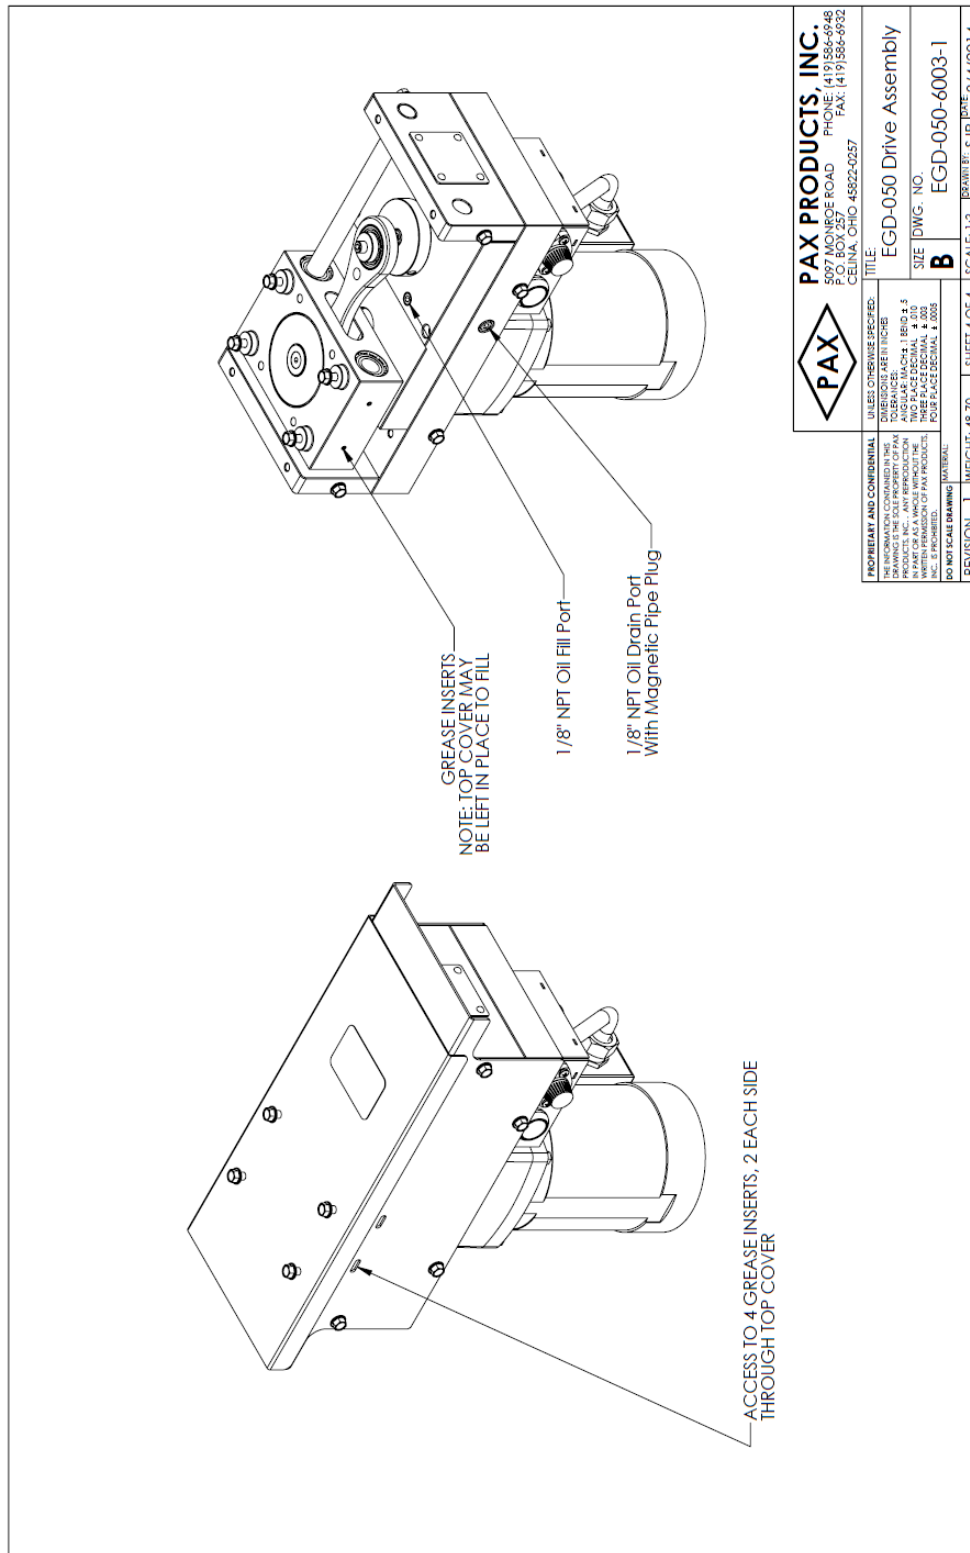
INSTRUCTIONS FOR LUBRICATING THE LINEAR BEARINGS
